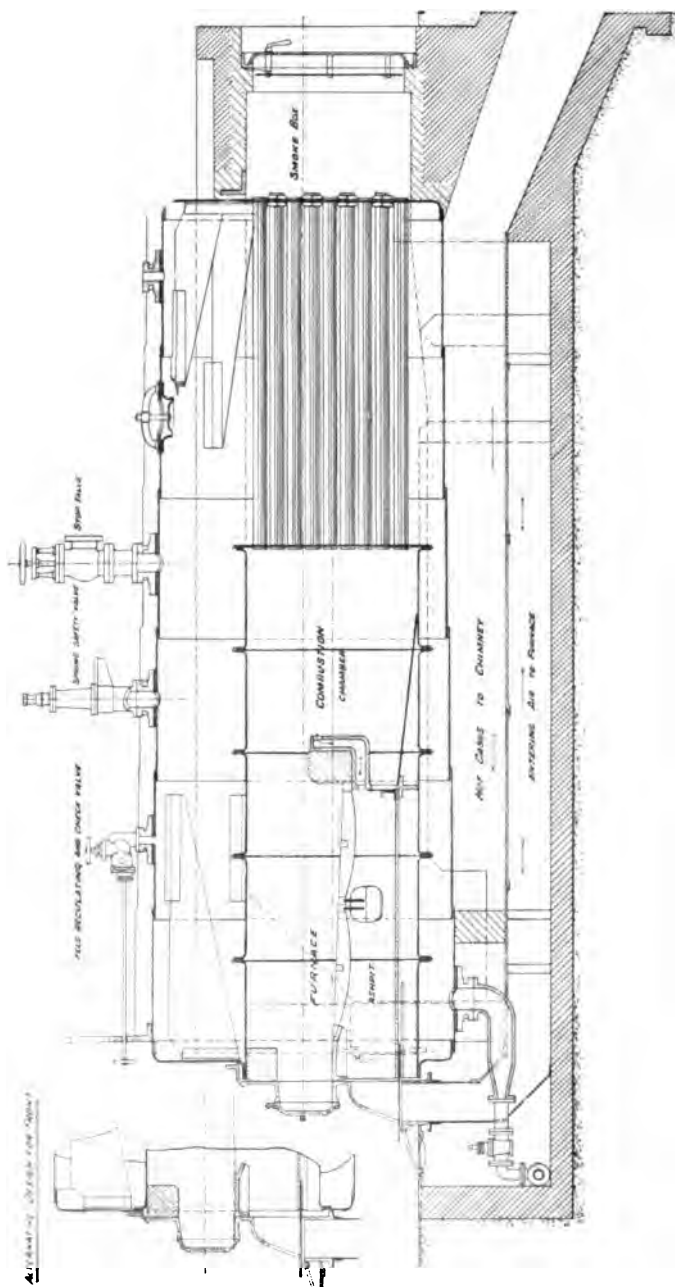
CORNISH TUBULAR BOILER—LONGITUDINAL SECTION.
